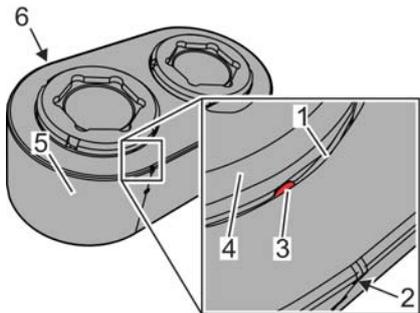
Screwing in the hexagon socket set screws of the rotating slide ring sealing parts
